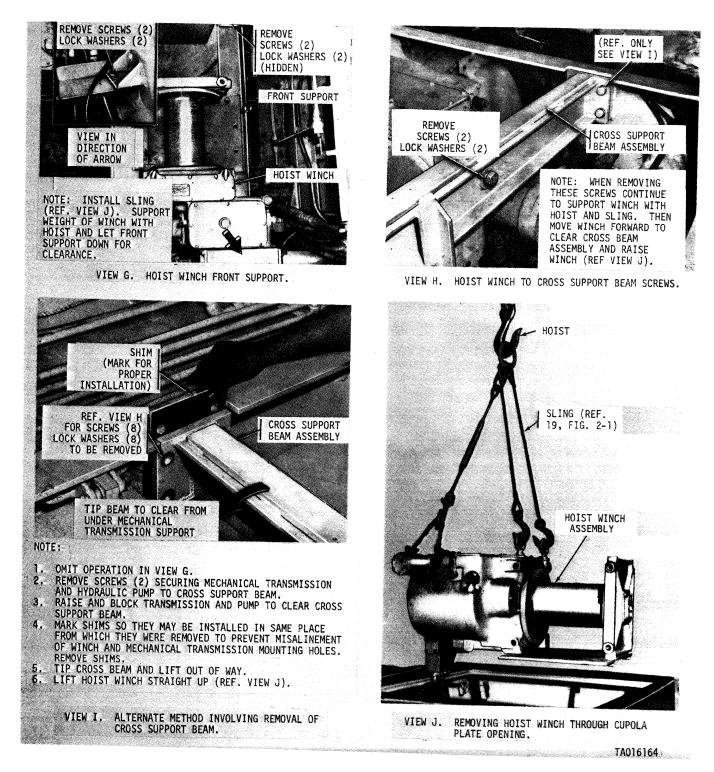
Hoist winch assembly-removal and installation (Sheet 2 of 2).
